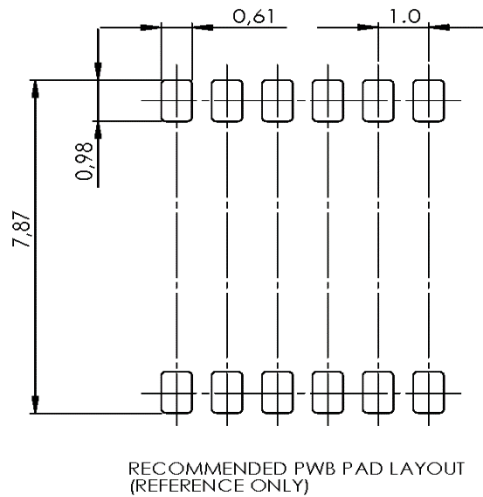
Recommended PWB pad layout for SCL3400-D01. All dimensions are in mm. The tolerances are according to ISO2768-f (see Table 9).
